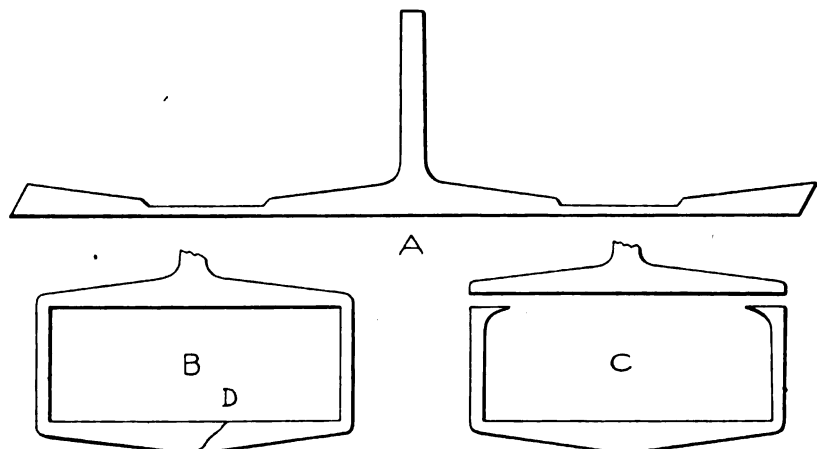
METHOD OF FORGING AN ENTIRE YOKE IN ONE PIECE.
